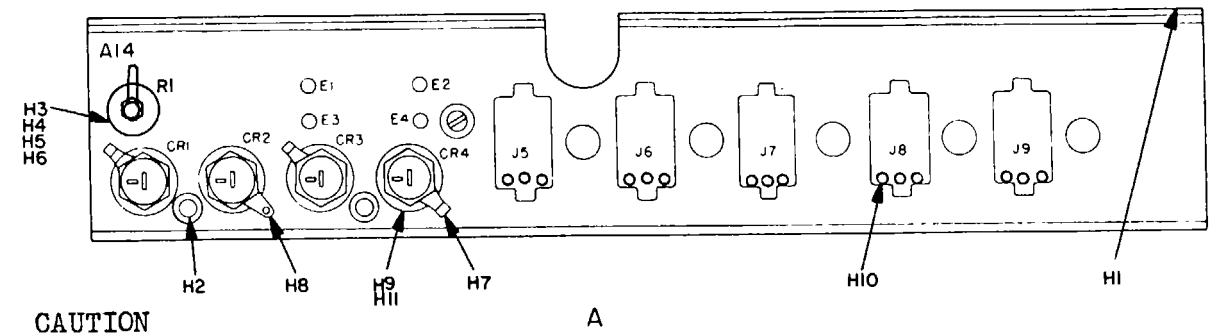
Sequence module component board assembly(PS1A12), component location diagram.
